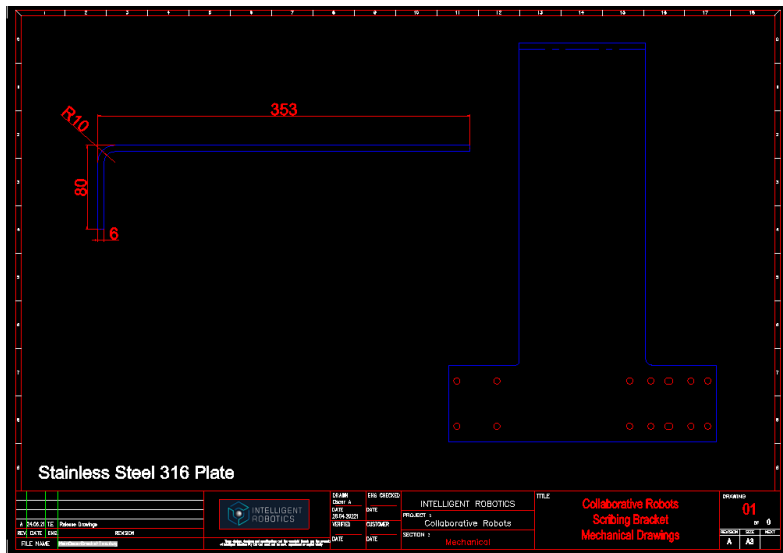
Scribe Marking Tool and Pen Mounting Plate
